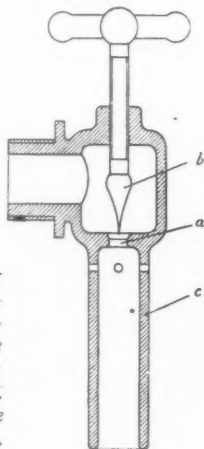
Design for quiet tap incorporating (a) short throttling tube below the valve seating. (b) Streamlined valve. (c) Delivery tube with small airholes.
